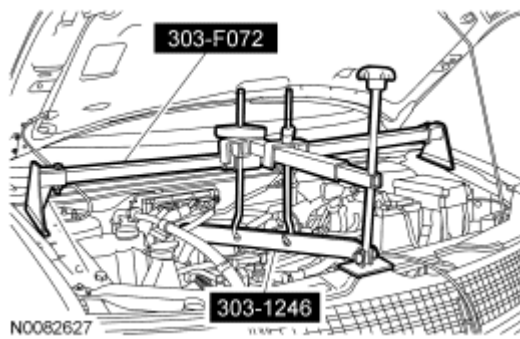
Installing Engine Support Bar & Spreader Bar To Support Engine
